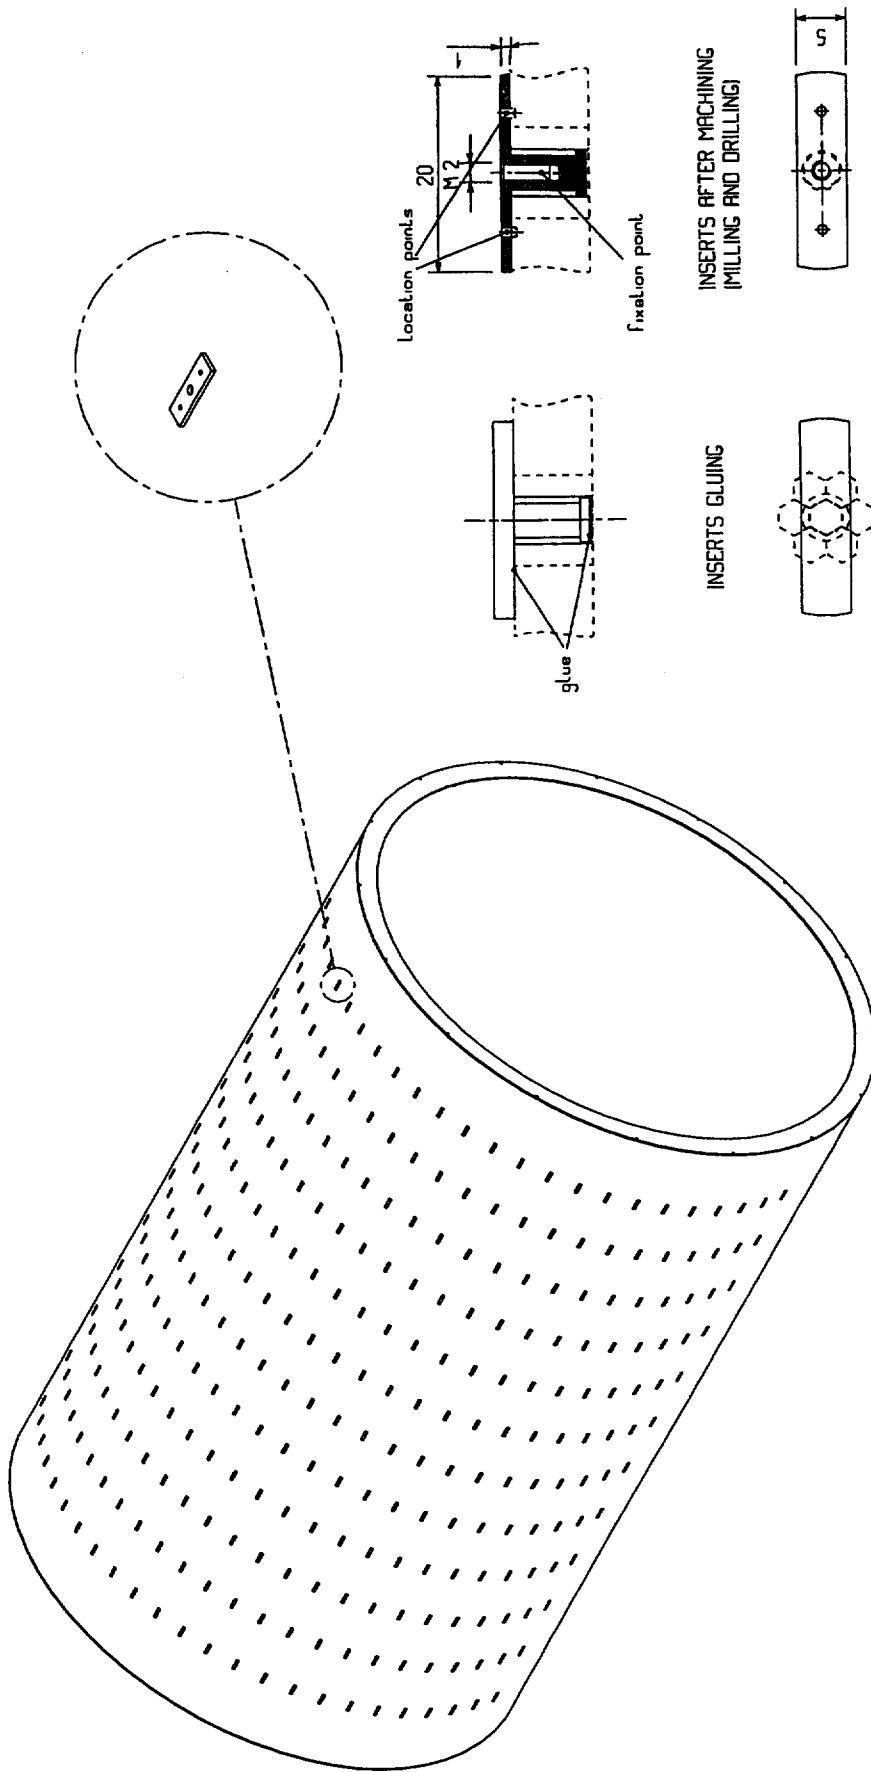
CFRP cylinder with end flanges and inserts to fasten silicon modules and cooling pipes.
